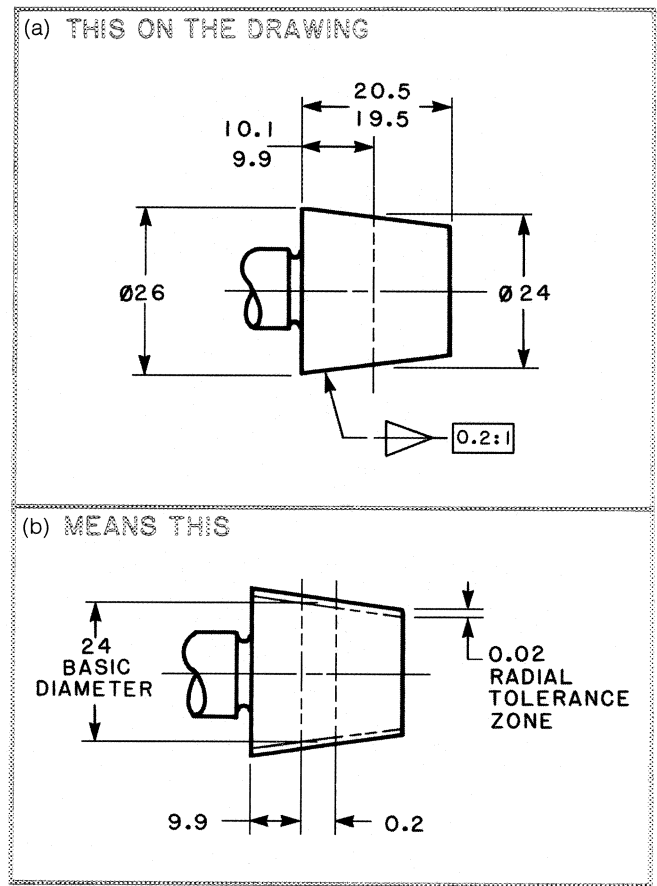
Specifying a Basic Taper and a Basic Diameter
